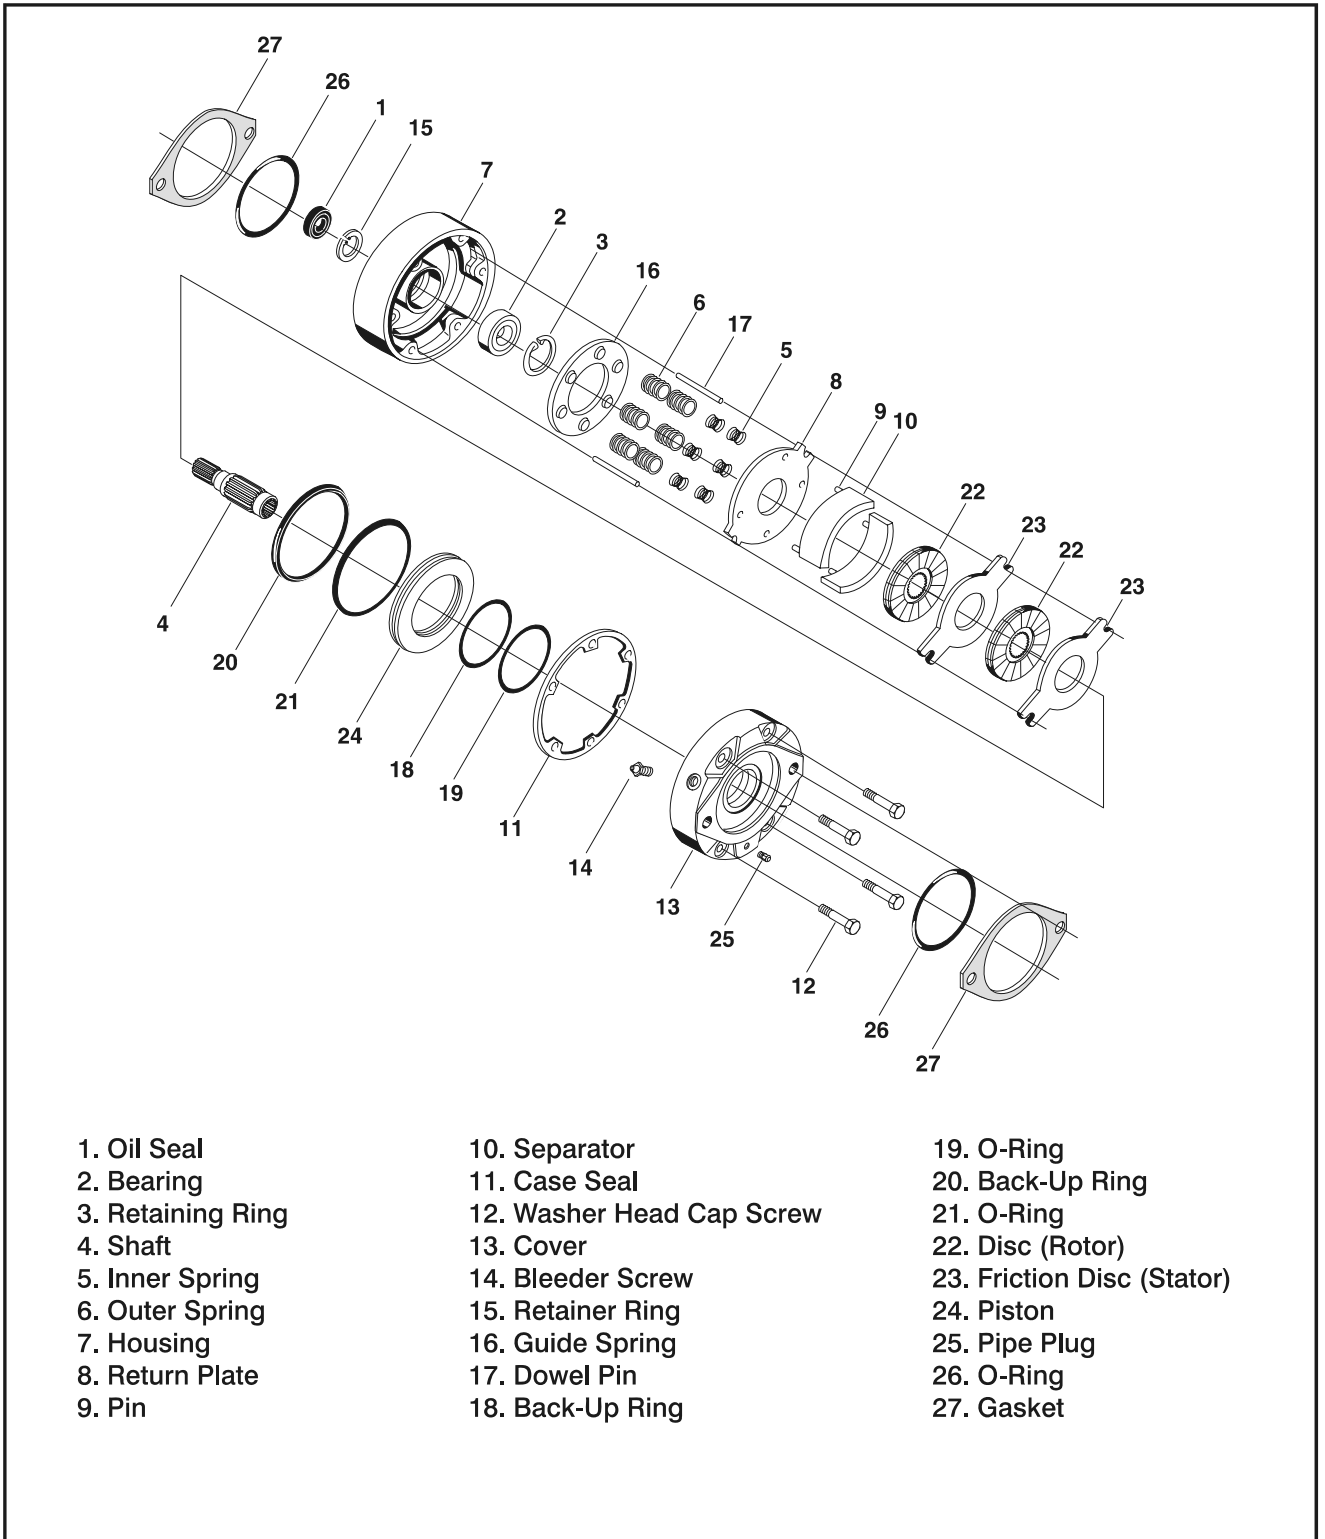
Drive Brake - (2WD/4WD Rear)
